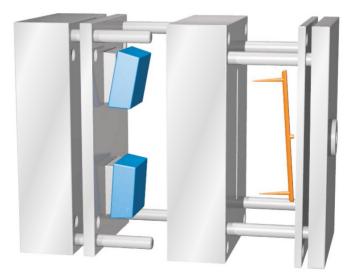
Typical 3 plate cold runner mold open and ejecting parts off the primary parting plane and ejecting the cold runner along the secondary parting plane
